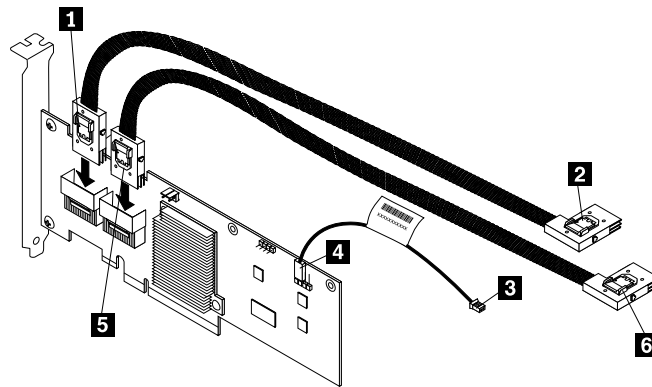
Connecting cables for server models with one 2.5-inch hot-swap hard disk drive backplane and a RAID card
